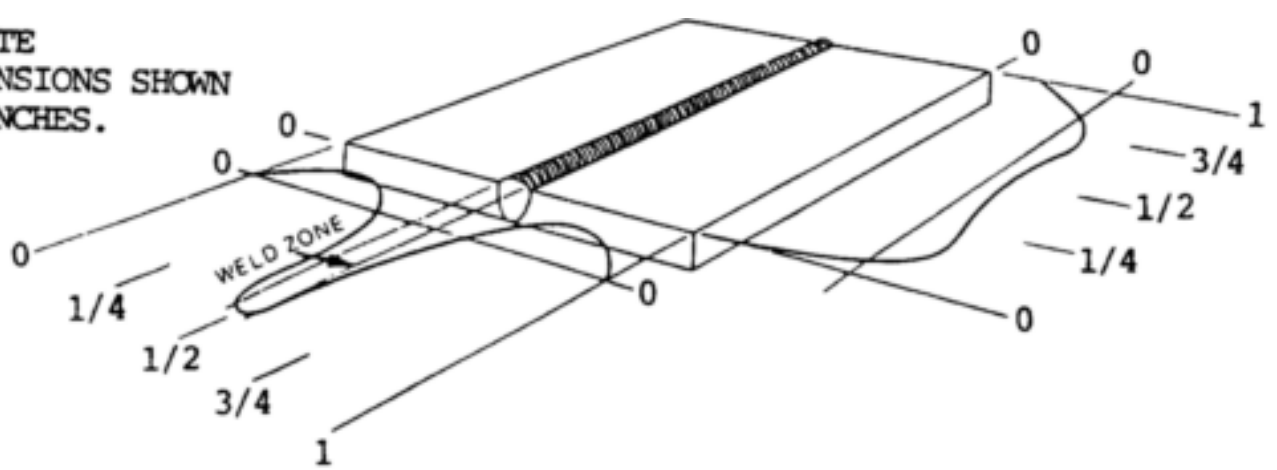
Butt welded joint -- residual stress pattern.
